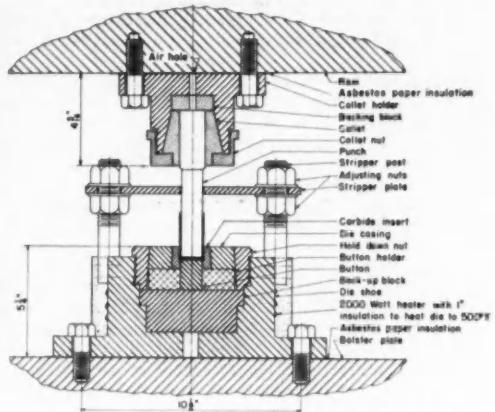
It takes this kind of a tooling setup to produce magnesium impact extrusions
